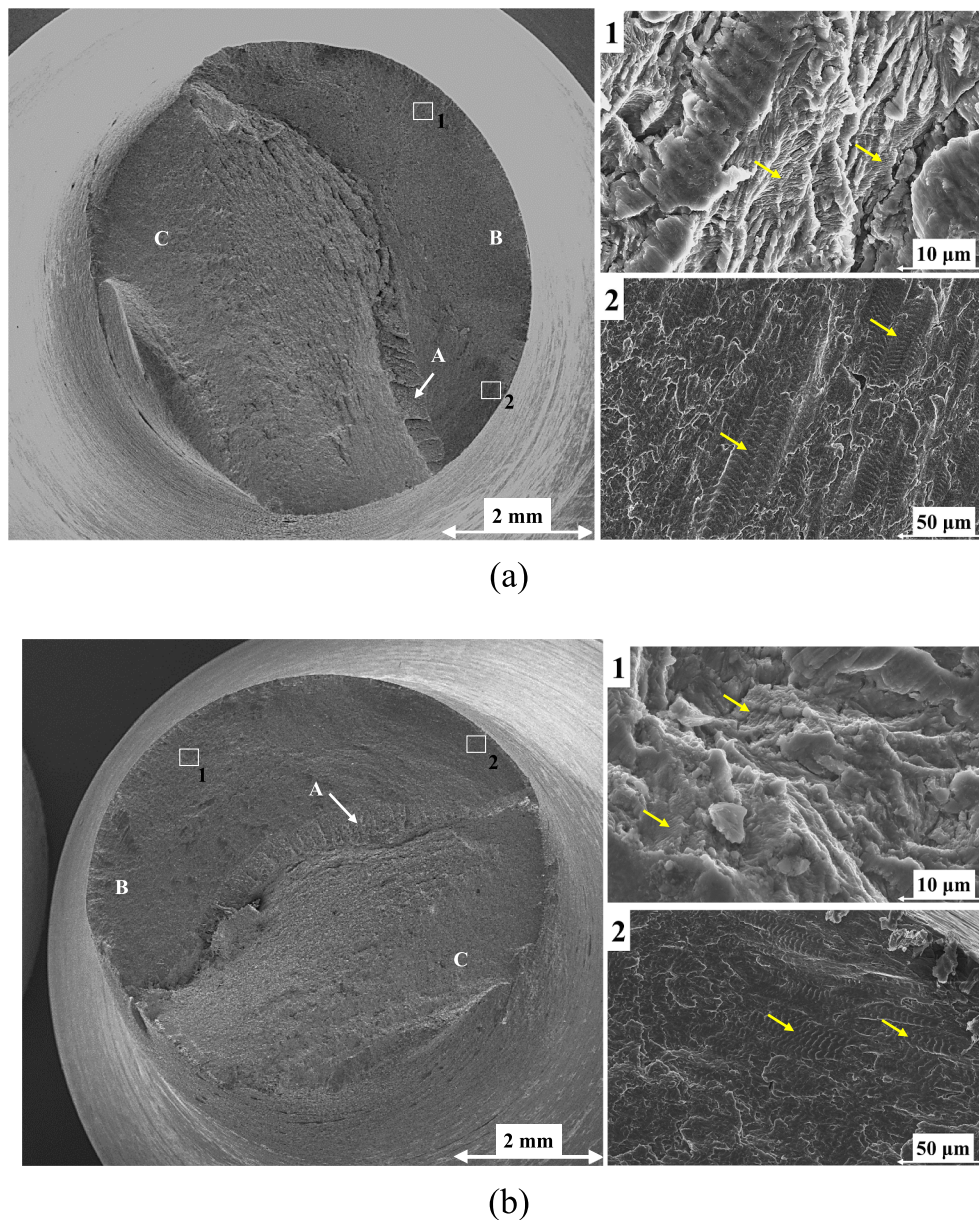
Fracture surface of ER70S-6 WAAM built specimens tested under multiaxial loading condition (a) for vertical, and (b) for horizontal specimens, presenting fatigue (1) and fishbone (2) features.
